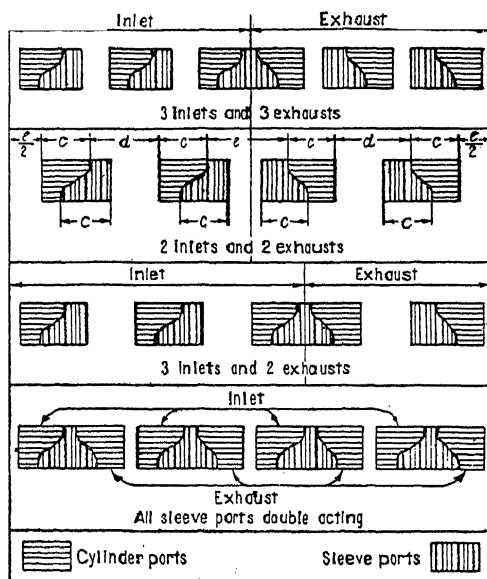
Alternative port arrangements for single-sleeve valve engine.
